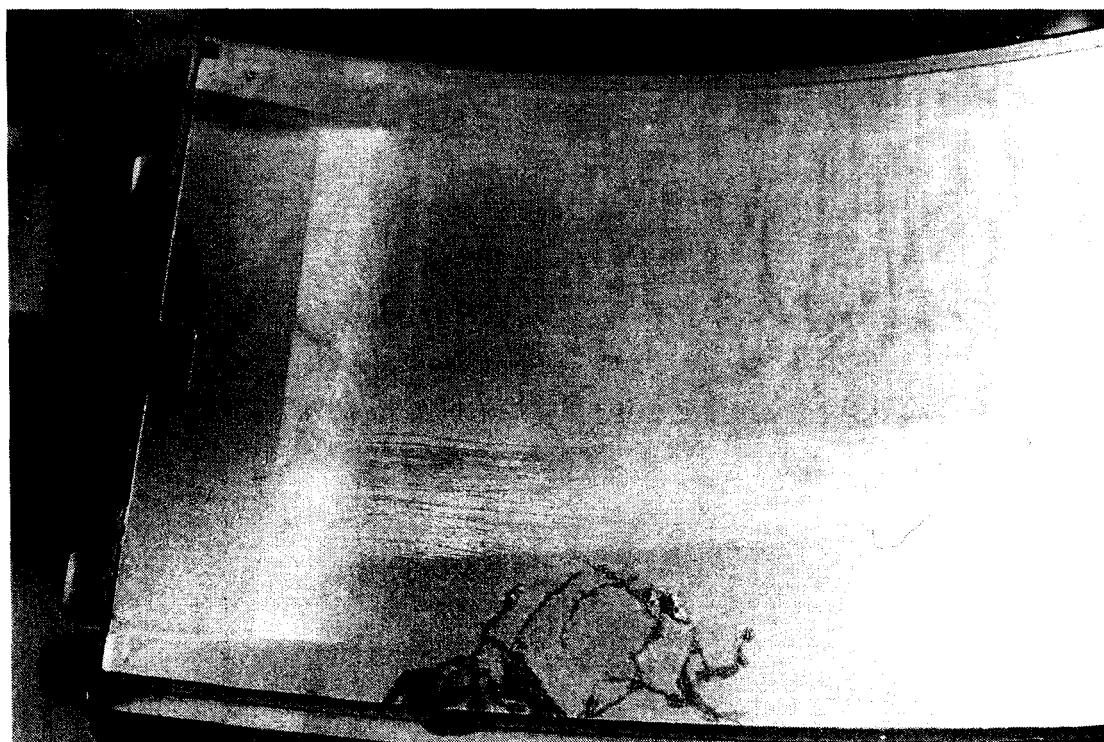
FATIGUE CRACKING AND THERMAL RATCHETING OF TIN BASED BEARING ALLOY
